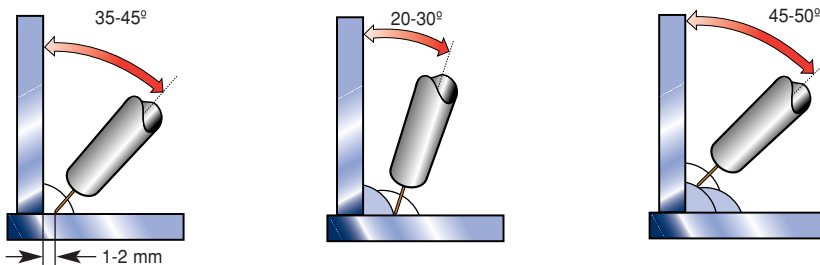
Multi pass welding of a leg length of 12 mm or more
